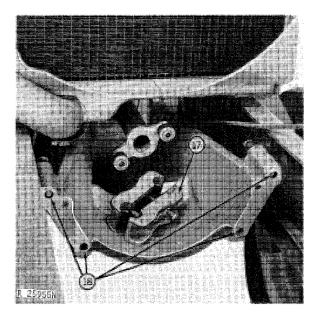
Hydraulic Pump Drive Coupling (Engine removed for illustration purposes)
